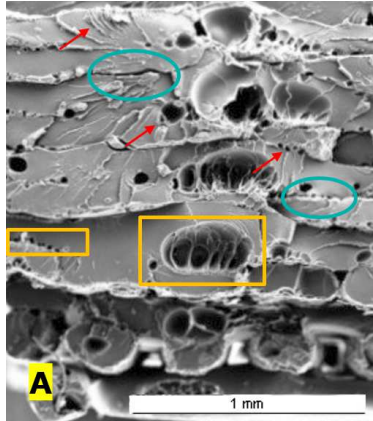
Fracture surface of 0,15 mm specimen
